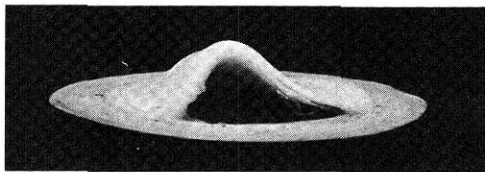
Breakage in forming of usually commercial sheet of polyethylene after keeping at 180°C for 30min.
